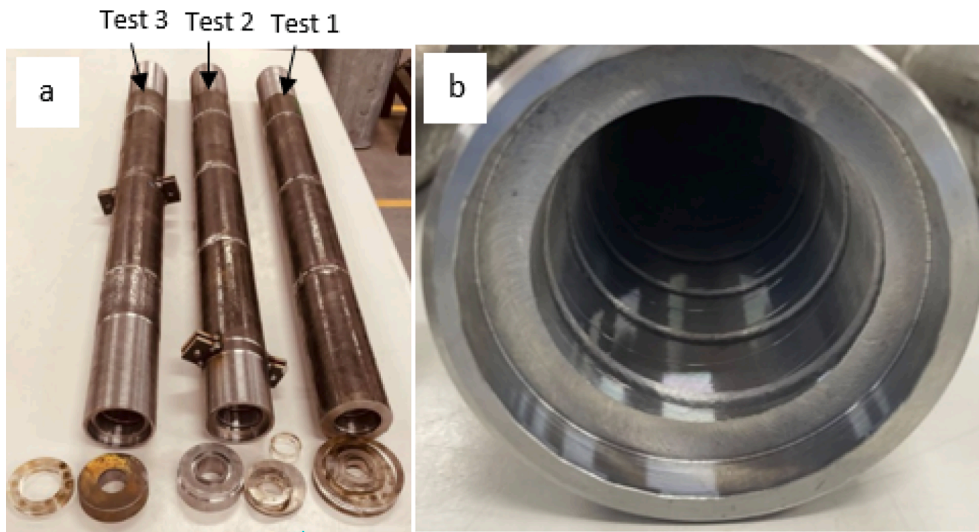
The materials used for specimen preparation including a) the manufactured hollow bars as confinement, and b) the internal rifling of the hollow bars.
